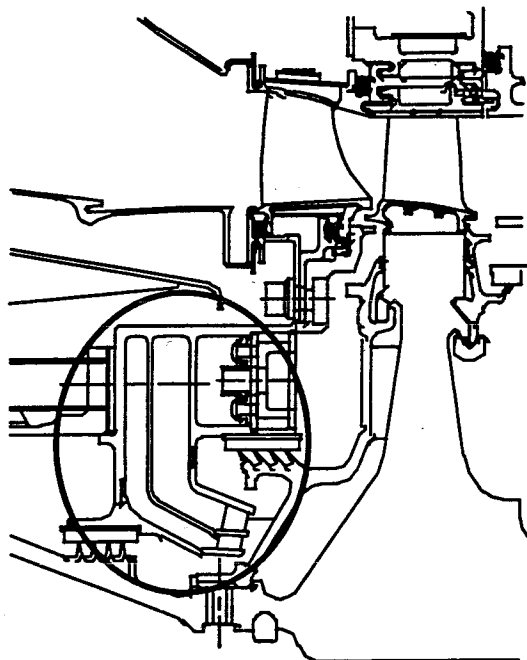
Modulated Turbine Cooling HPT Double Accelerator
